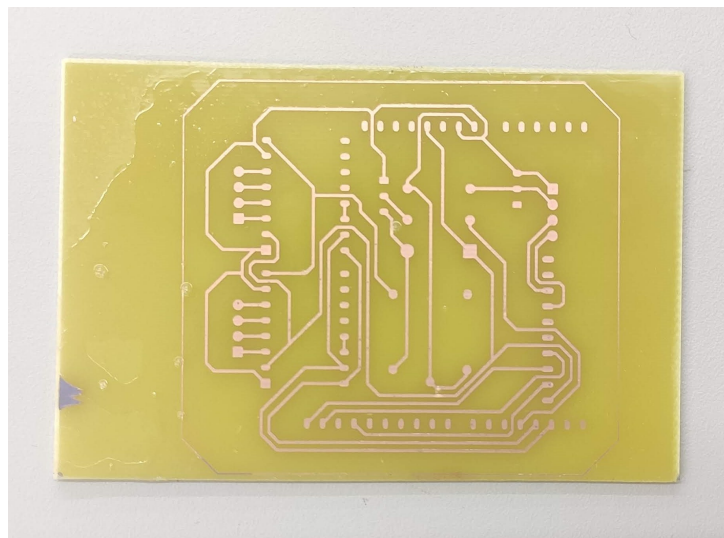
The PCB after its fabrication process, before drilling.
